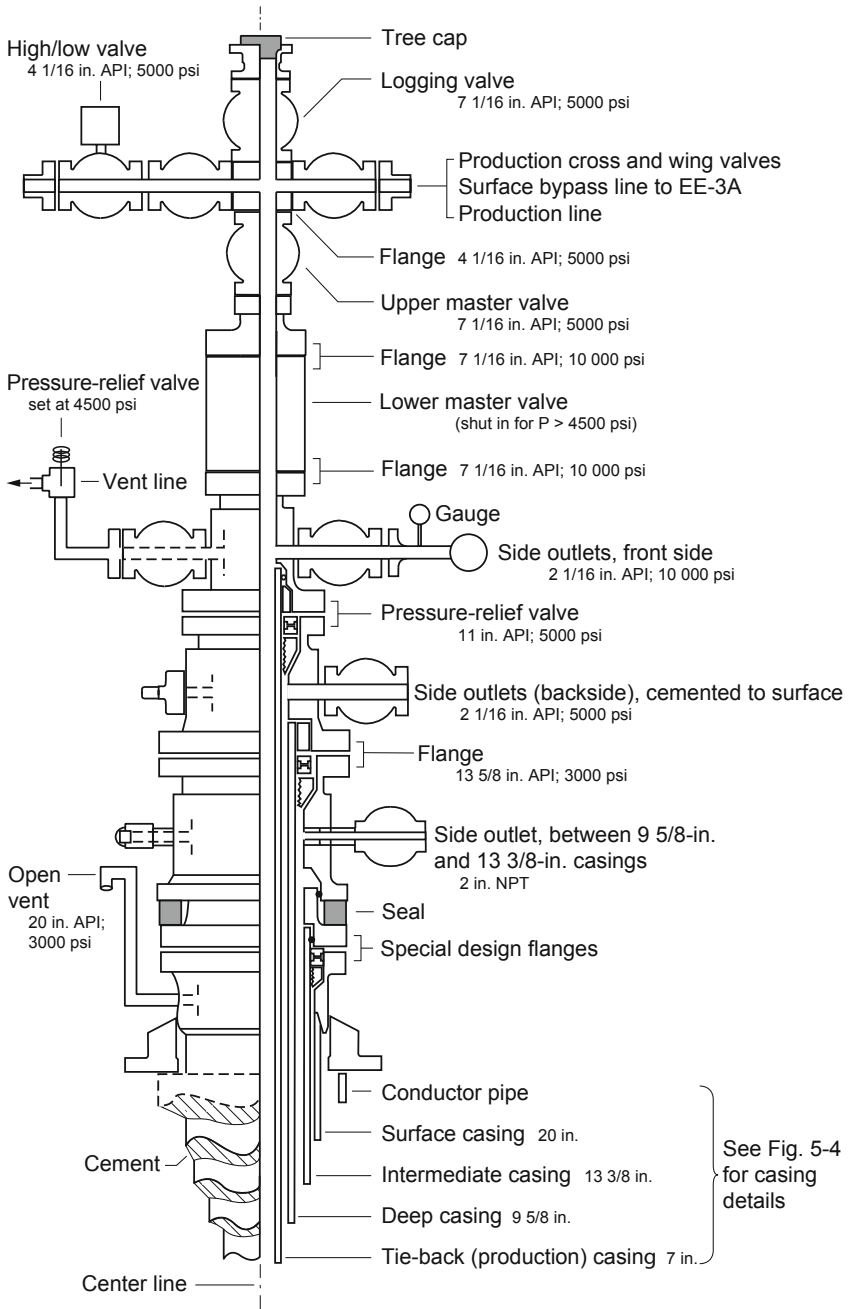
Production segment: production wellhead assembly (Well EE-2A). Left: exterior view; right: cutaway view. Adapted from Dreesen et al., 1989
